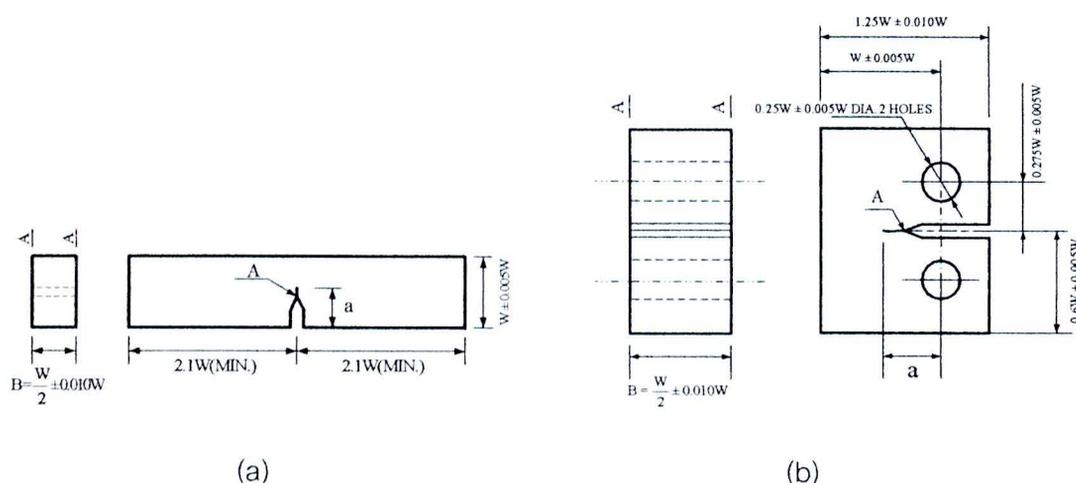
Schematic of specimen configuration and crack: (a) single-edge notched bending (SEB) specimen and (b) compact tension (CT) specimen
